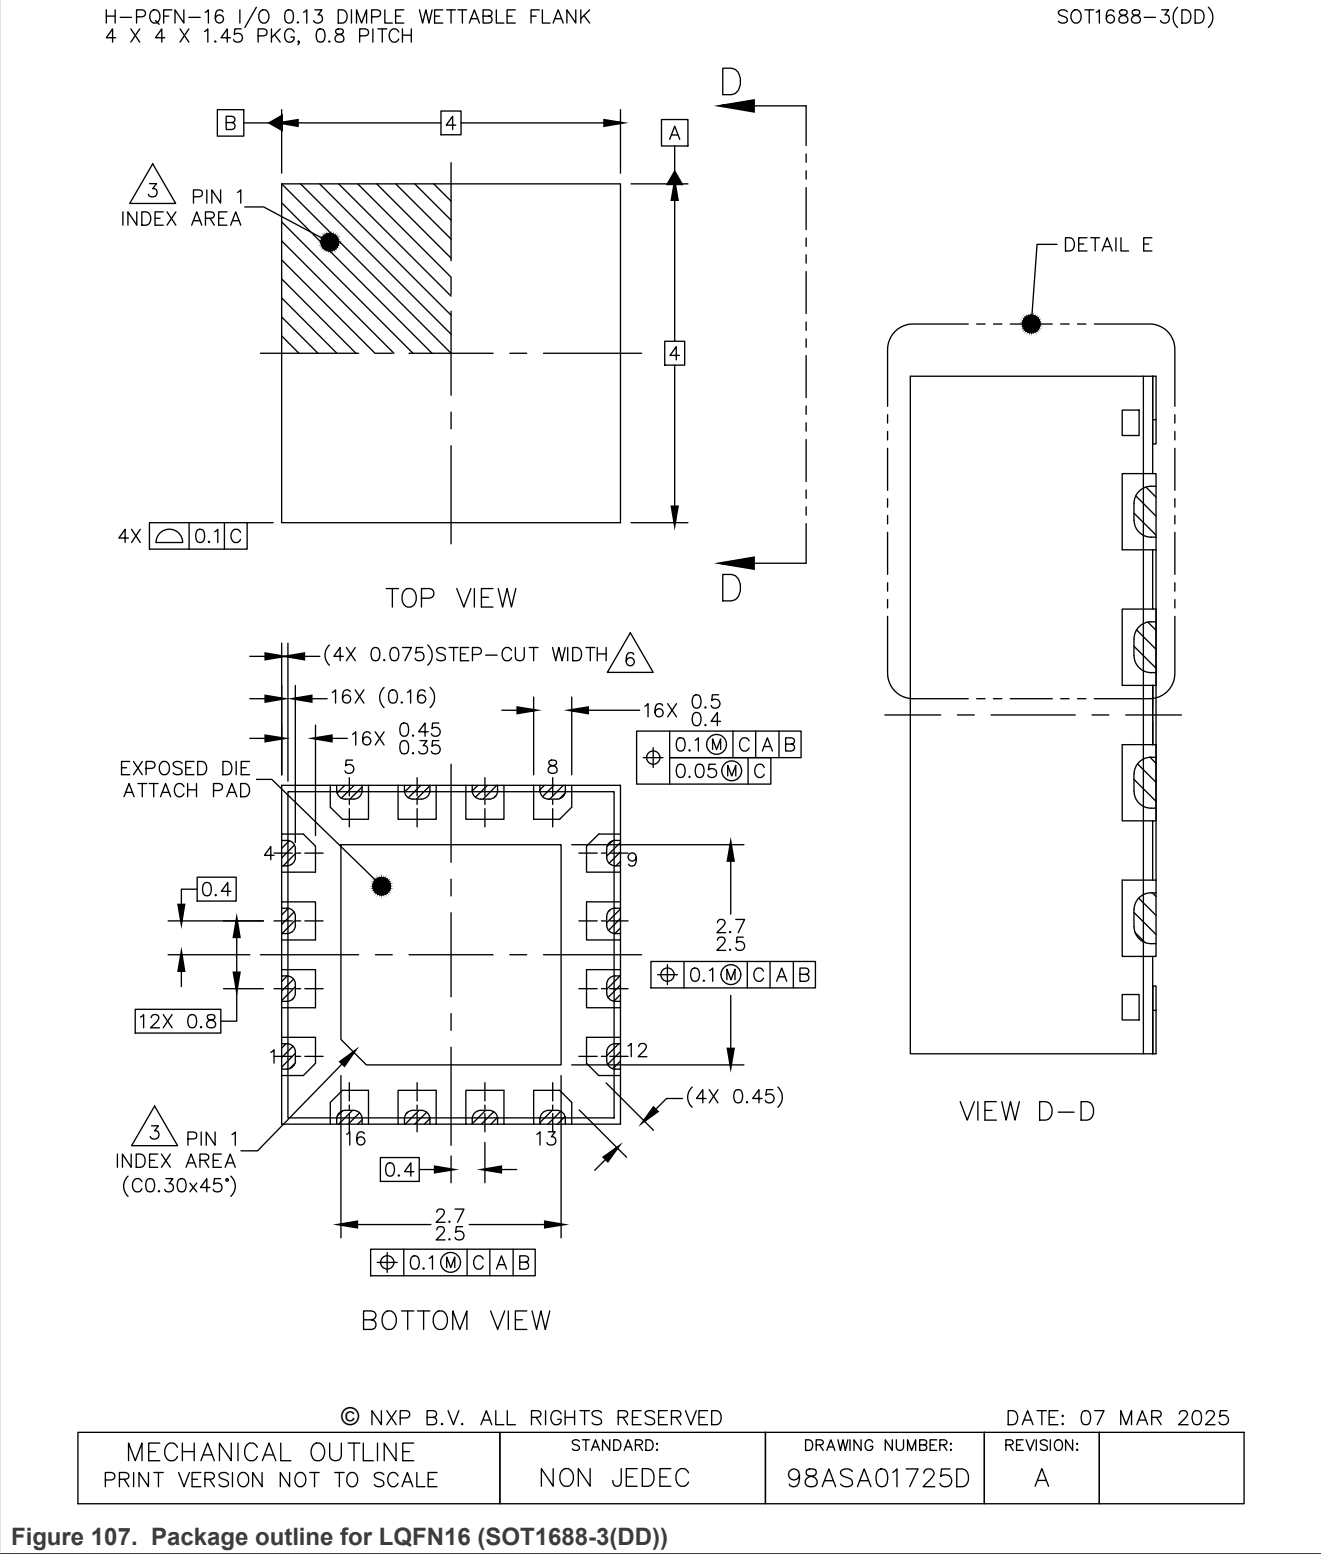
Package outline for LQFN16 (SOT1688-3(DD))
